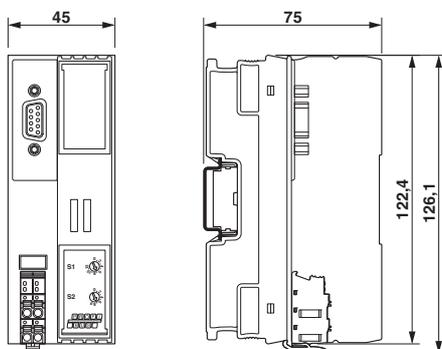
Nominal dimensions of the bus coupler housing with separate bus base (type BK+: e.g., S20-PB-BK, S20-PN-BK+)
